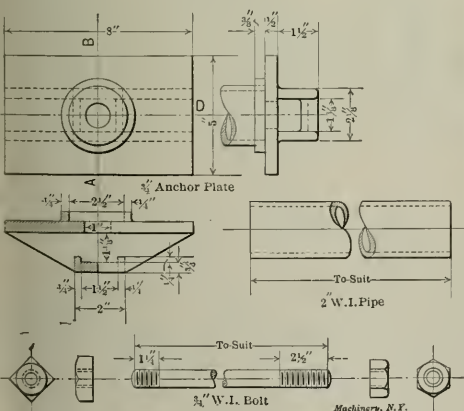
Improved Anchor Plate for Square Nut and Threaded Rod.
